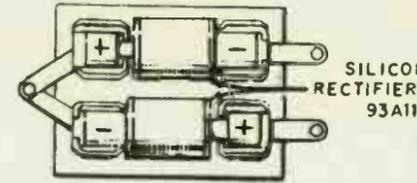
View of Fuse Holder Showing Position of Cartridge Type Selenium Rectifiers.
